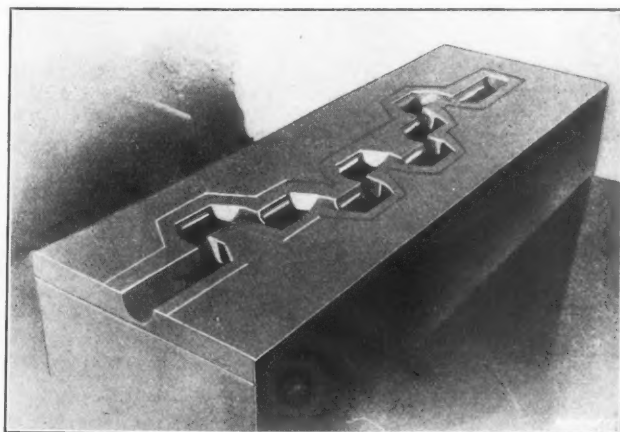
The Finish Drop-forging Die for the Crankshaft
